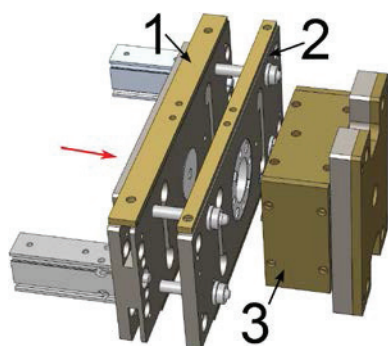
Exploded mold view. Red arrow indicates Injection side, 1: Injection plate, 2: moving middle plate and 3: ejection side plate.
